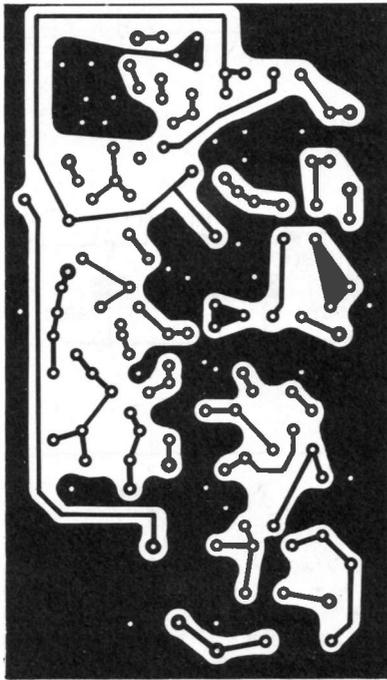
"WHITFIELD" TX MIXER DRIVER (PCB4) FOIL SIDE
